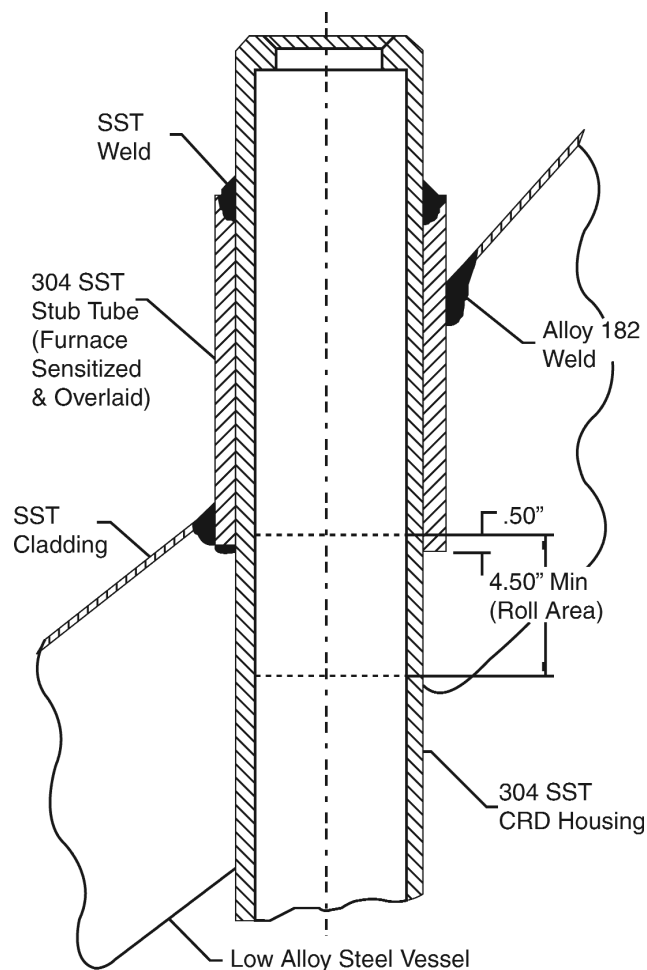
A TYPICAL BWR SET-IN CRD STUB TUBE DESIGN
